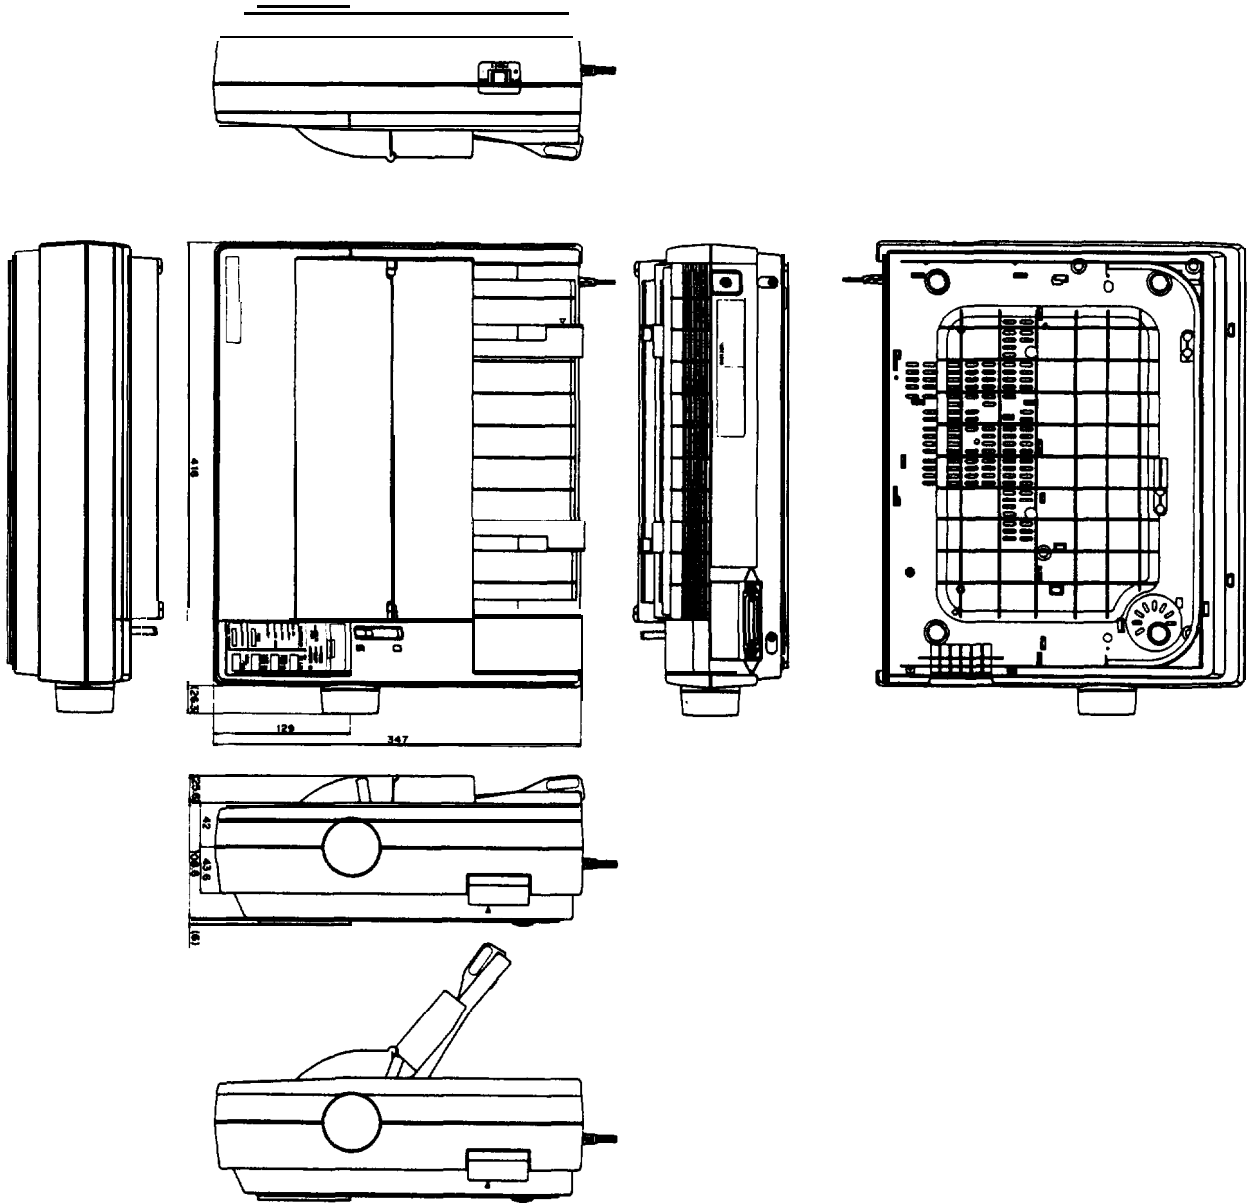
LQ-510 Printer Cover B Case Outline Drawing
